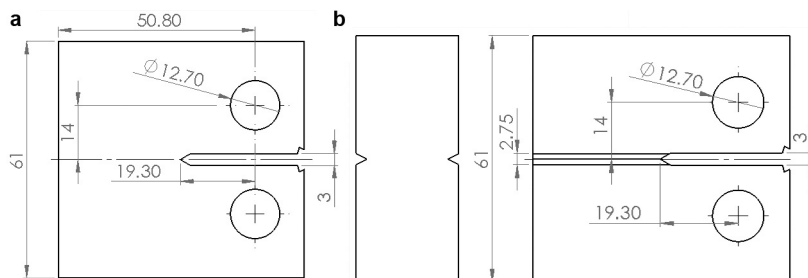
Experimental C(T) specimen (a) plain shaped; (b) side-grooved.
